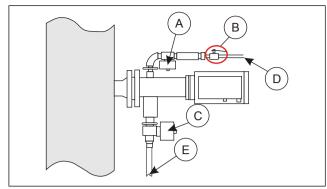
Connections of Valmet SD501: A - water valve, B - closing valve, C - sample delivery valve, D - water in, E - sample line.
